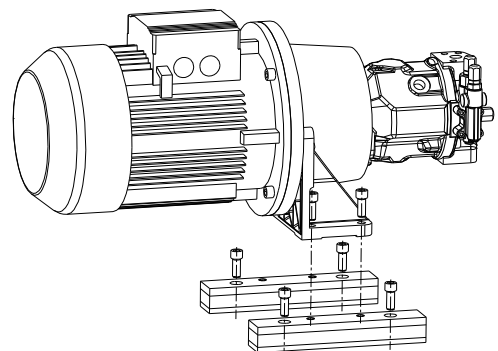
Assembly of damping rods DSFL with foot flange PTFL
